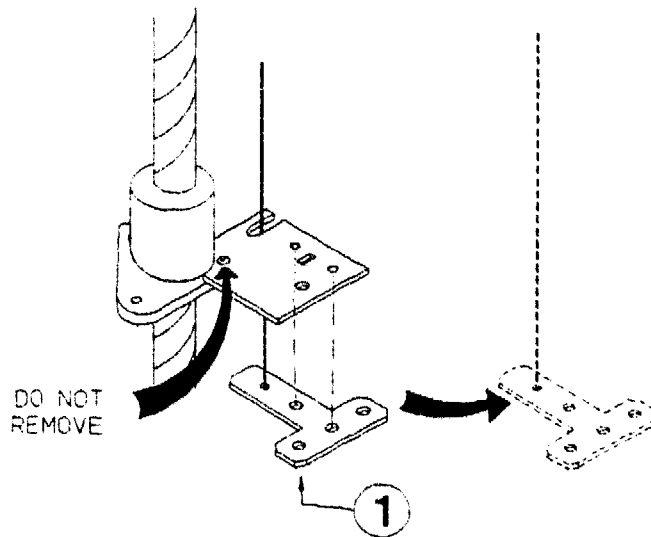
Removing the Vertical Tensioner Cable T-bar (Deskside Option)
